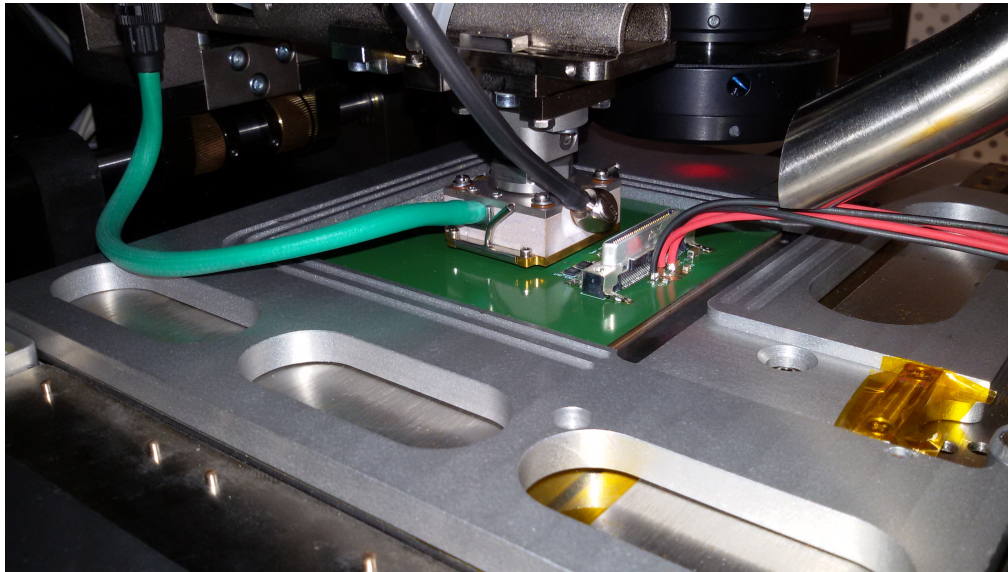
Ropperi board during the bonding process inside the bonding machine.
